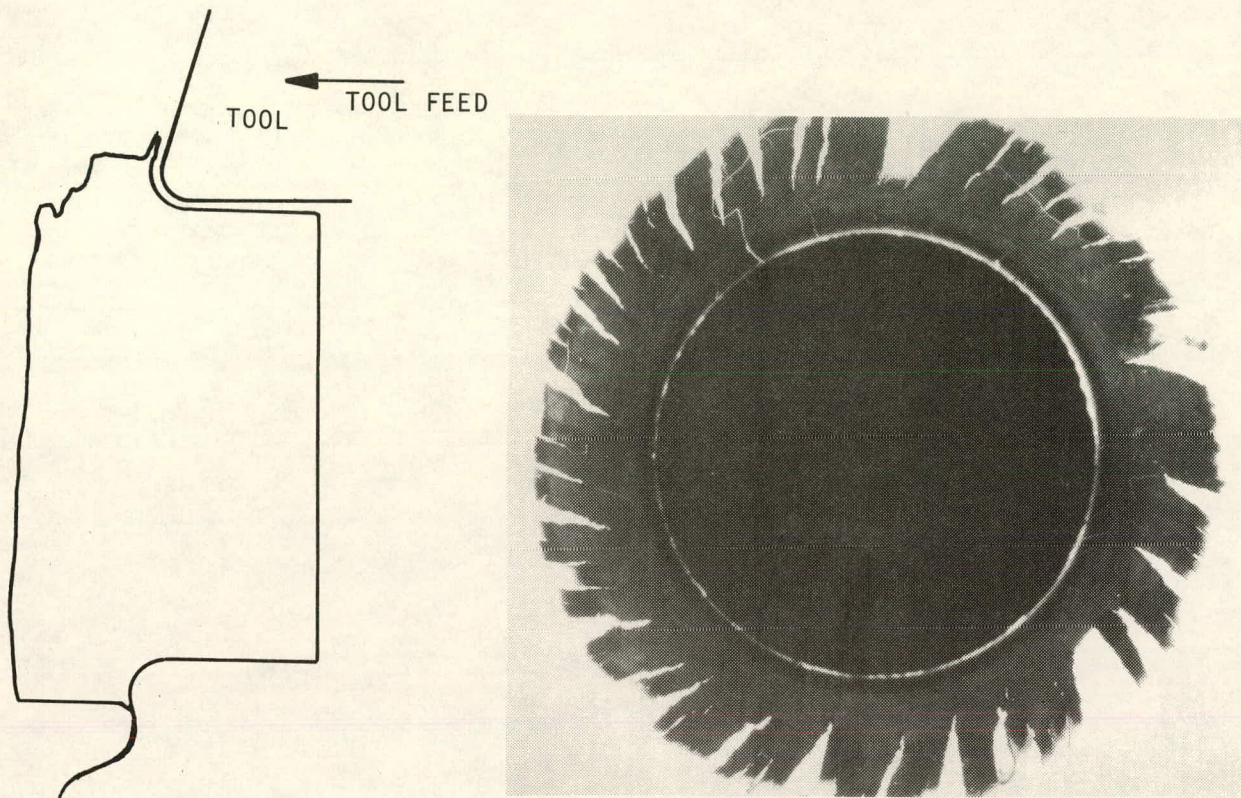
Illustration Showing Cutting of 303Se Stainless Steel (Left) Which Produced Poisson Burr (Right) Similar to That Illustrated in Figure 17
